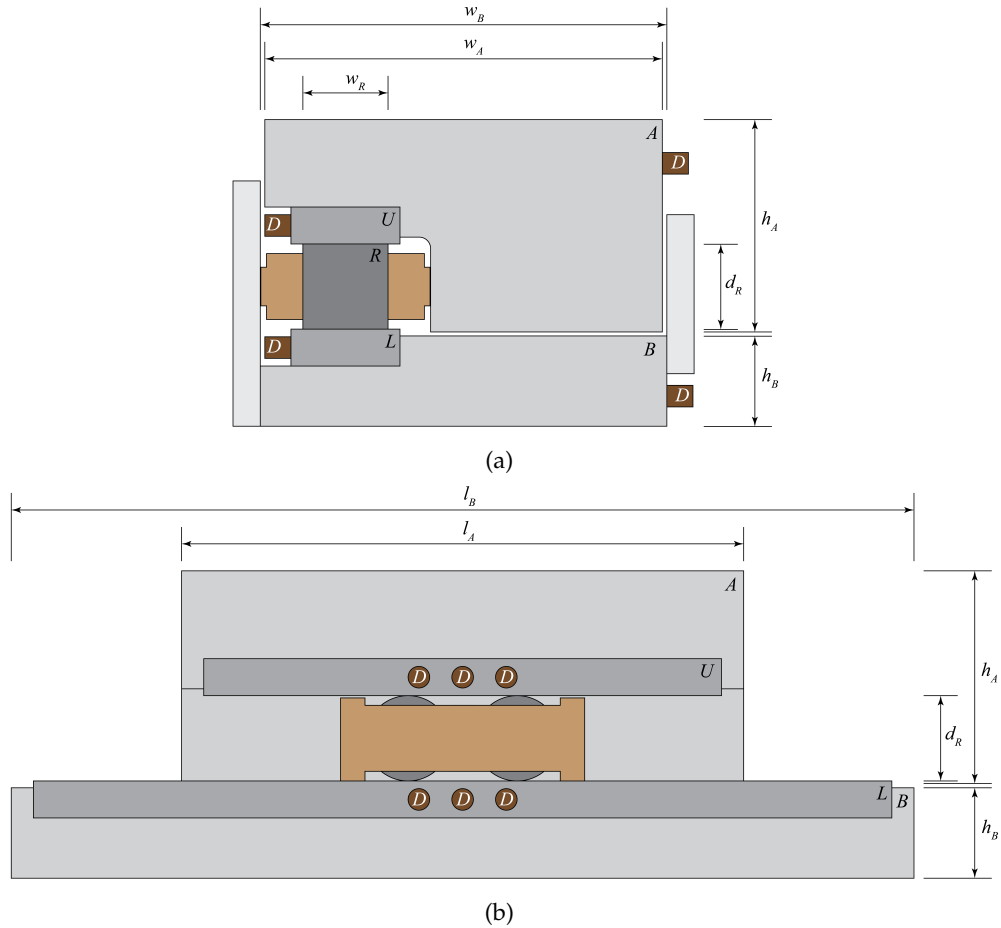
Illustrations of the turret bearing test set-up (to scale, top section), showing; (a) a cross-section of the bearing with component identifiers, and (b) a front view of the bearing without the cover-plate. Indicated components are the roller (R), the nose raceway (L), the support raceway (U), the nose substructure (B), the support substructure (A), and the sensor arrays (D).
